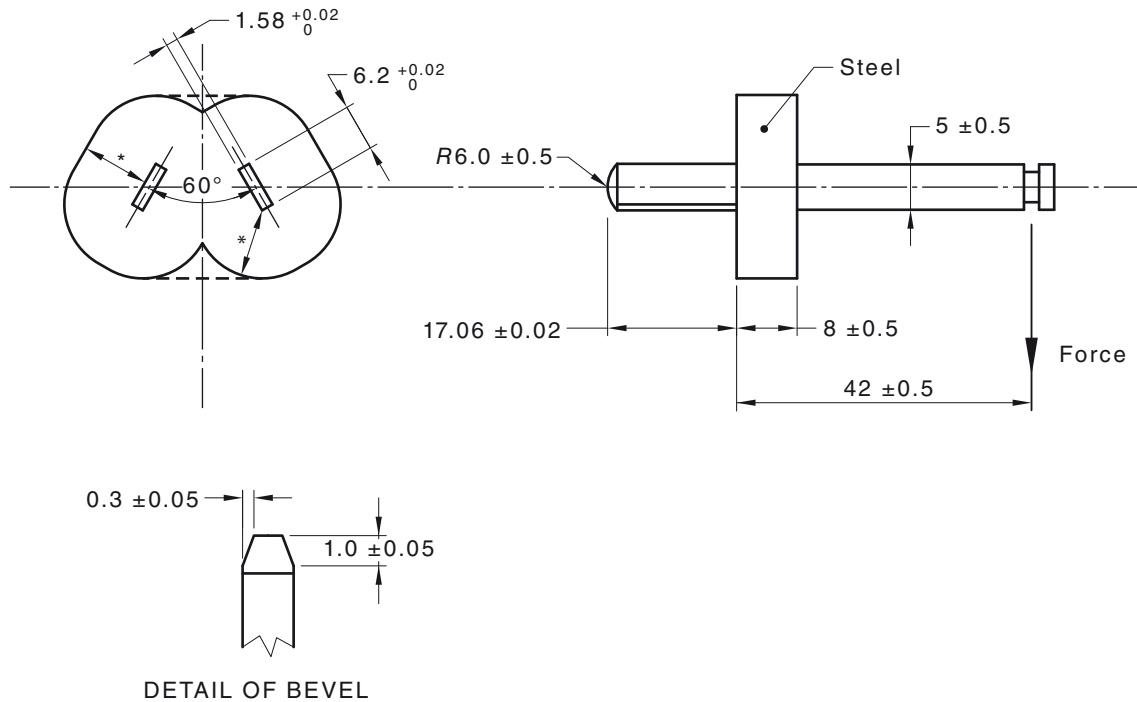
FULLY RECESSED SOCKET-OUTLET
